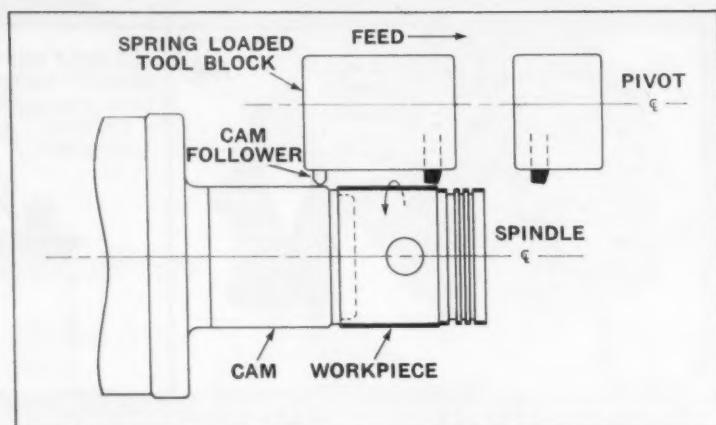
Diagram showing cam, cam follower, work-piece, and tools of Ex-Cell-O machine (Fig. 1)
